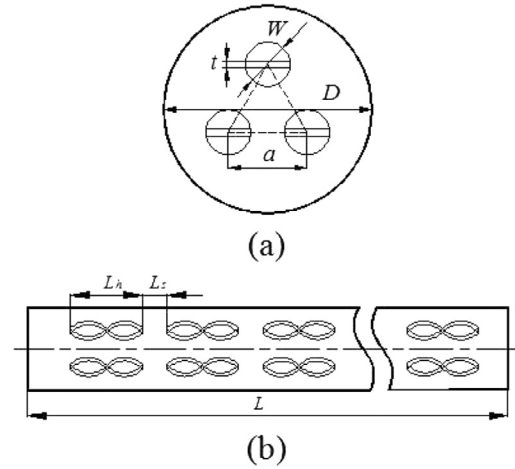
Three regularly-spaced twisted tapes in tube, (a) cross section geometric dimension; (b) axial geometric dimension.
